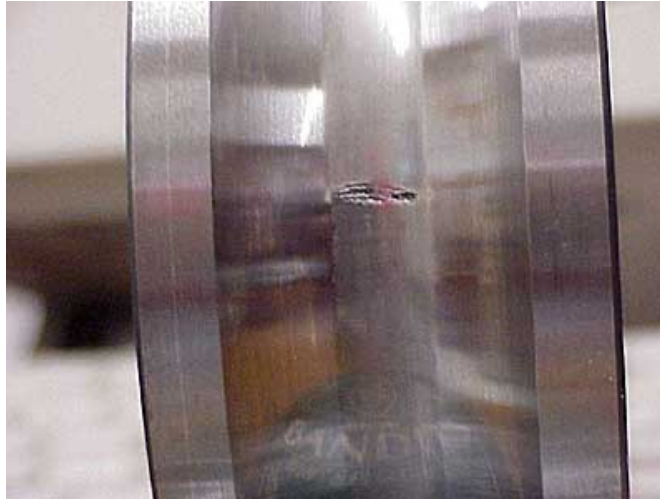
Example of ball bearing inner race defect. Source: reference [49]
